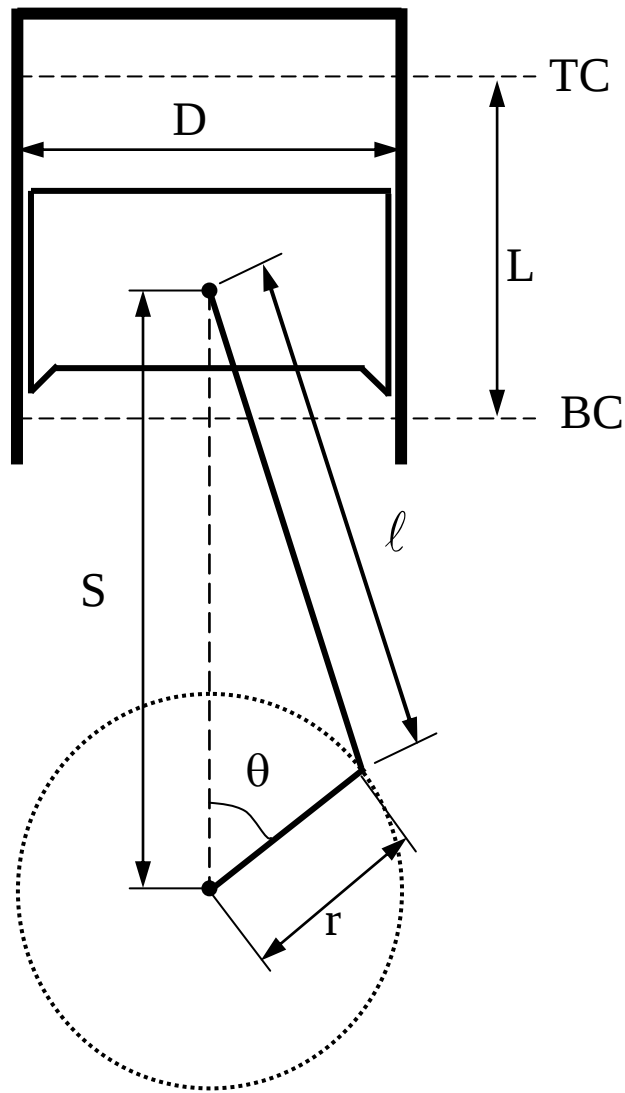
geometry of cylinder, piston, connecting rod, and crankshaft.
